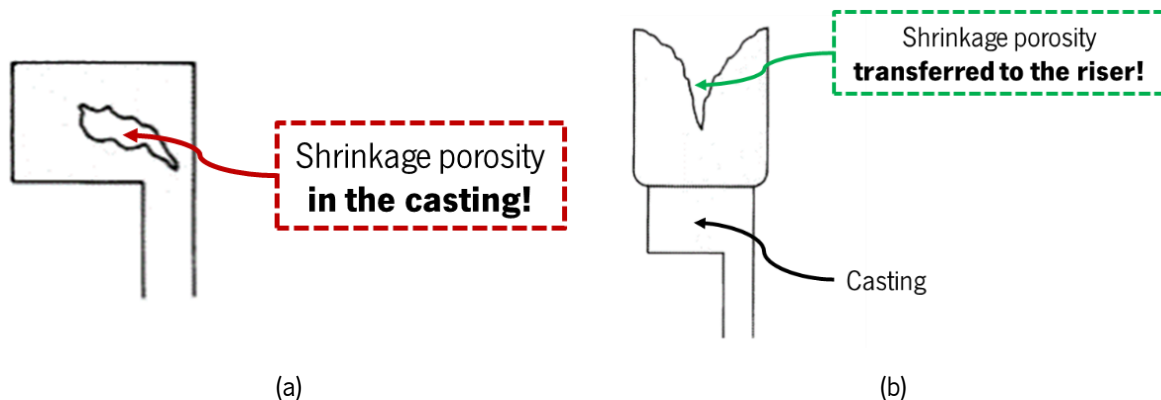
(a) Casting without riser - shrinkage porosity at the last point to solidify (Hot spot) - and (b) casting with a riser - no shrinkage defect encountered.
